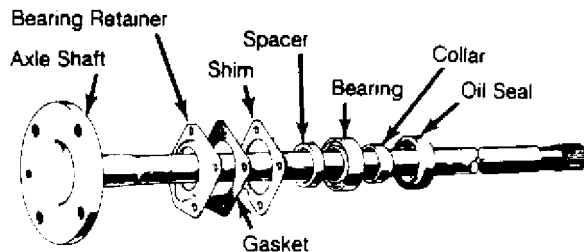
Exploded View of RX7 Axle Shaft Assembly
